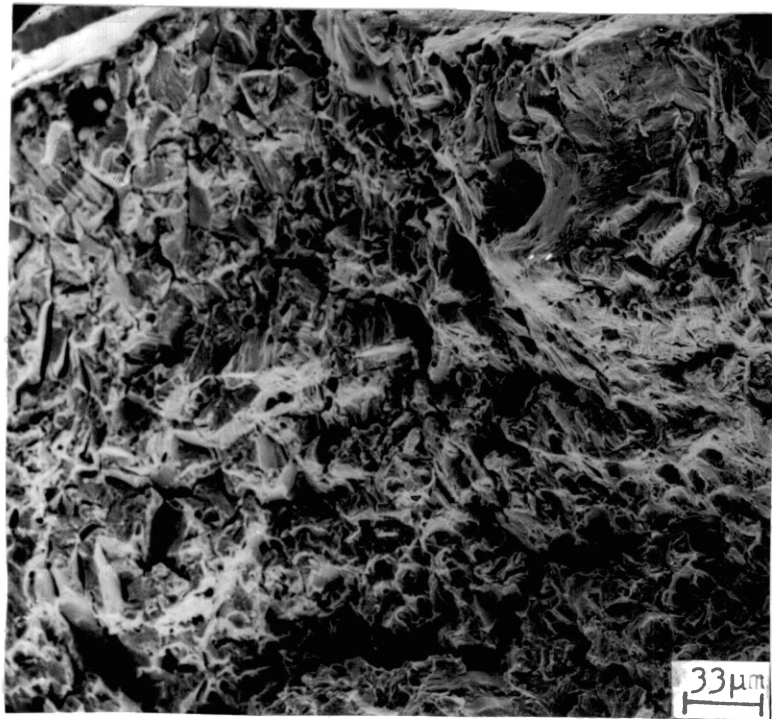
Non-microvoid type fracture surface that occurs in Inconel 625 around the outside edge of the specimen. The fracture mode changes quickly to microvoid, as seen in the lower right corner.
